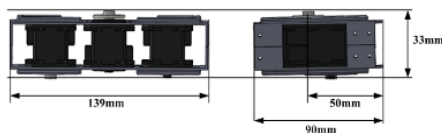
Waist mechanism dimension of HIWIN MAN.
